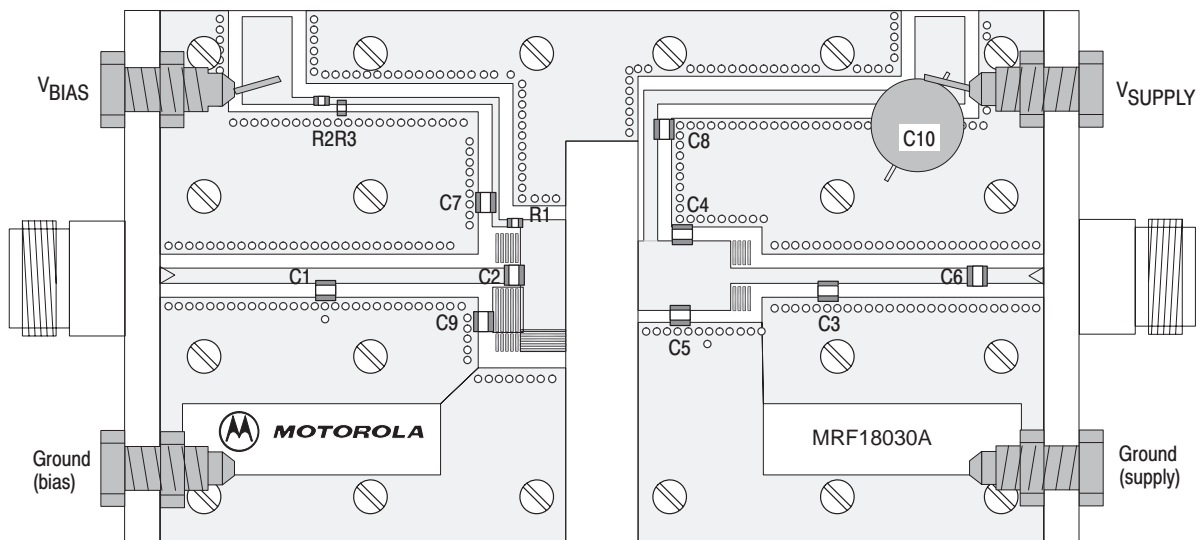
1805 – 1880 MHz Test Fixture Component Layout
